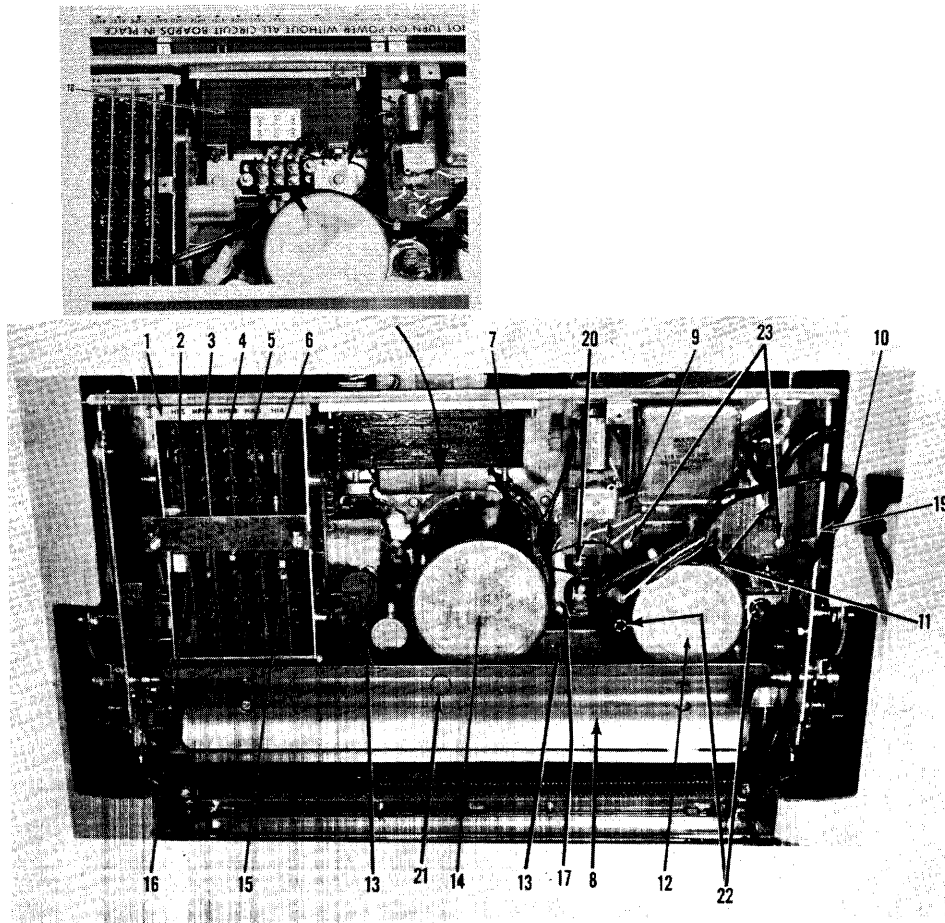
Frame Assembly (Top View), TermiNet 1200 Printer
